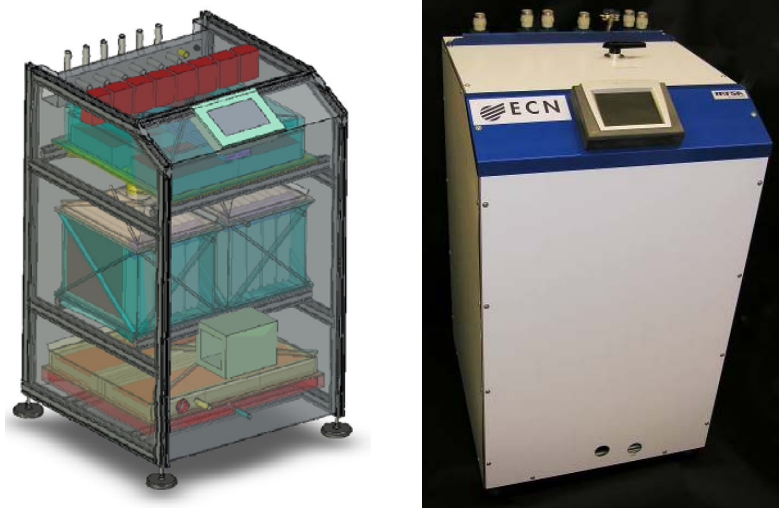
Design drawing and picture of the ECN 2.5kW adsorption chiller
